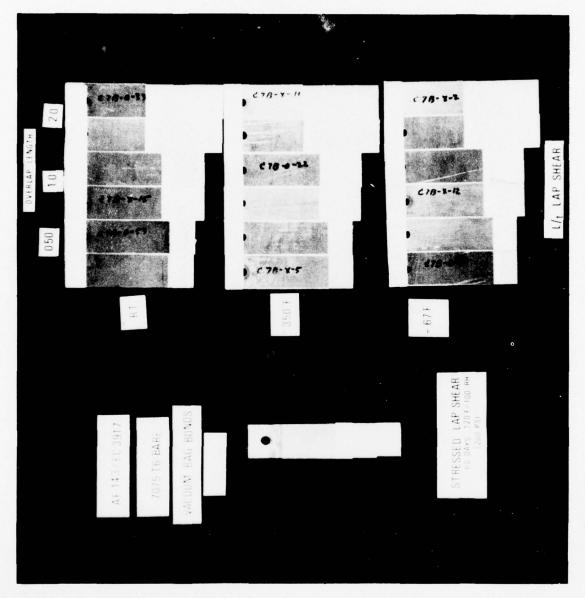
Specimen Failure Surfaces—AF 143, PasaJell 105, Vacuum Bag Bonds
